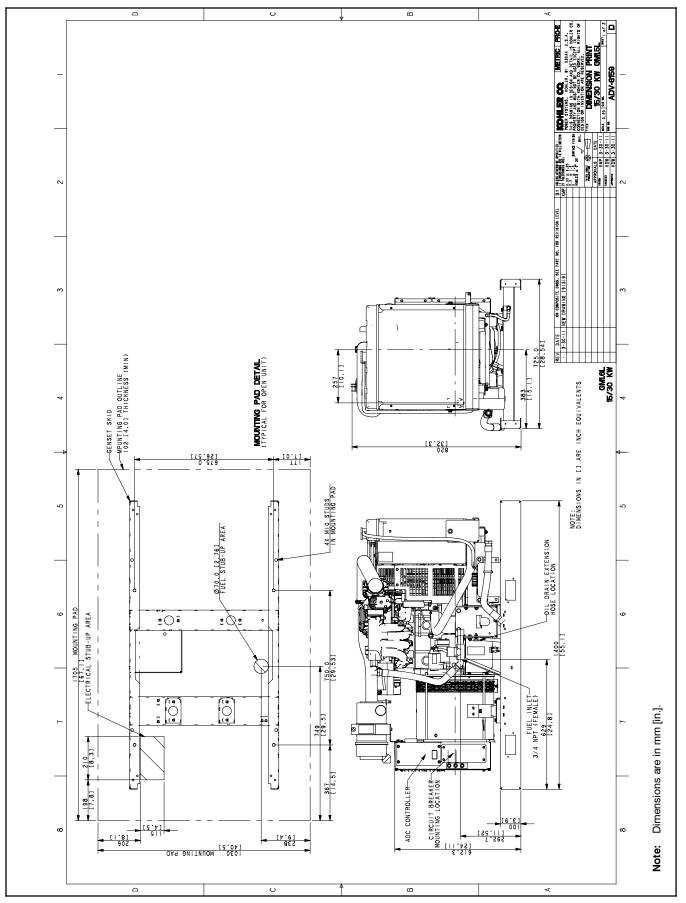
Dimension Drawing, ADV-8159, Sheet 1, Generator Set with Customer Connection Box
